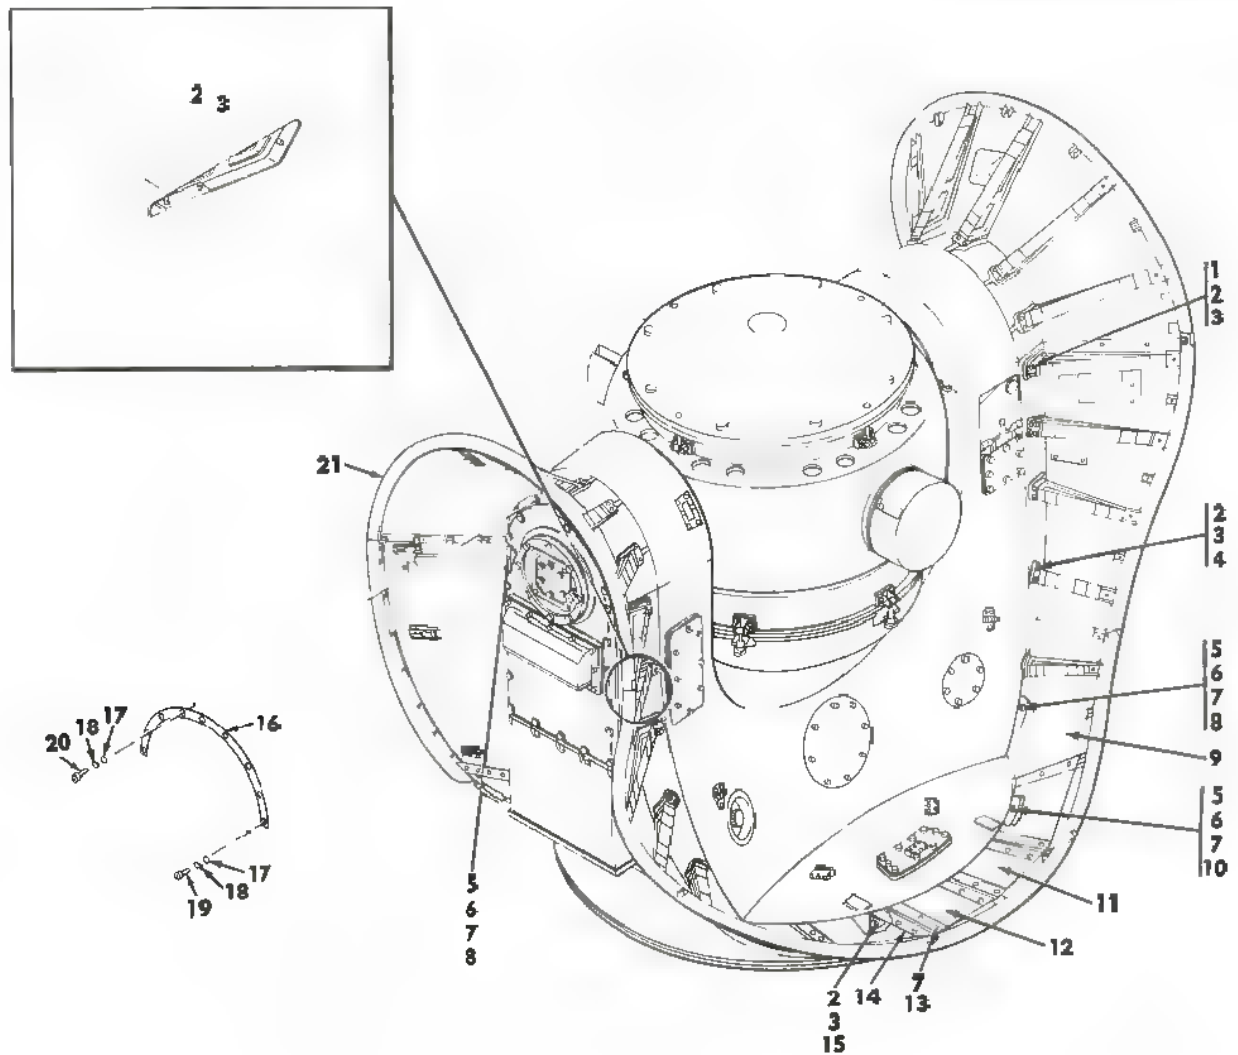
MOUNTING ASSEMBLY, TELESCOPE /8015860/-PARTIAL EXPLODED VIEW
